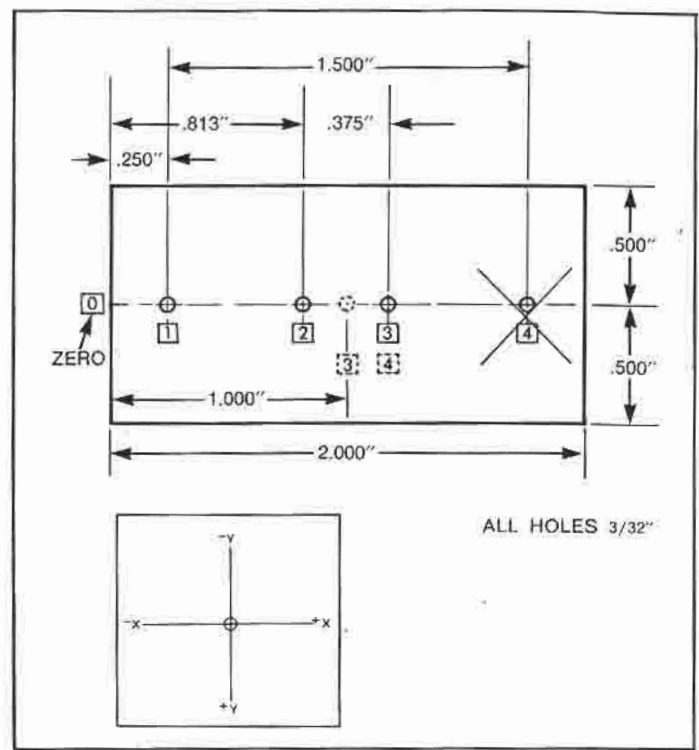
Workpiece Example (Step Insertion and Deletion)
